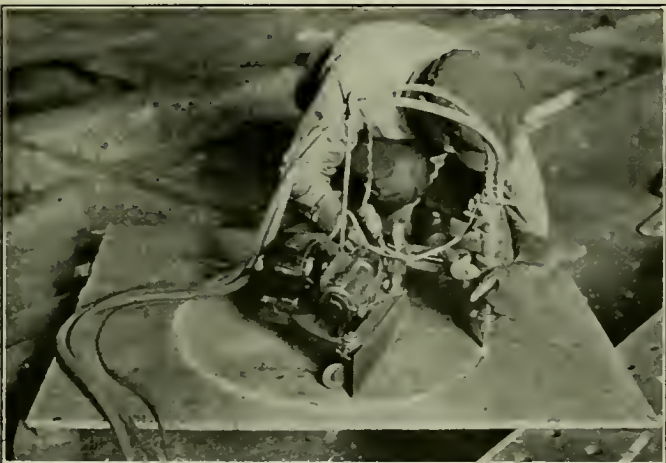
Cutting to a Circle in 1/2-In. Steel Plate
